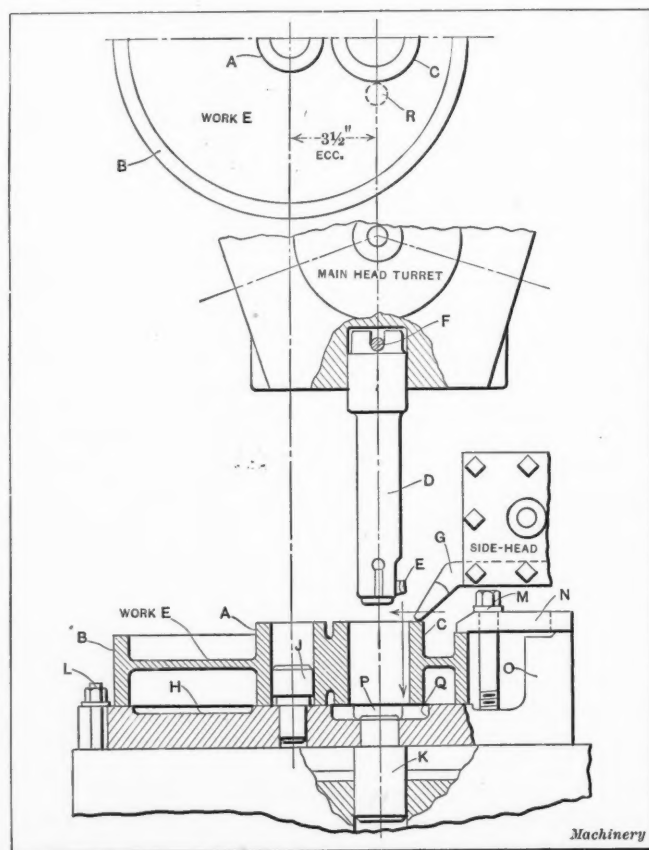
Eccentric Turning Fixture for Vertical Turret Lathe
